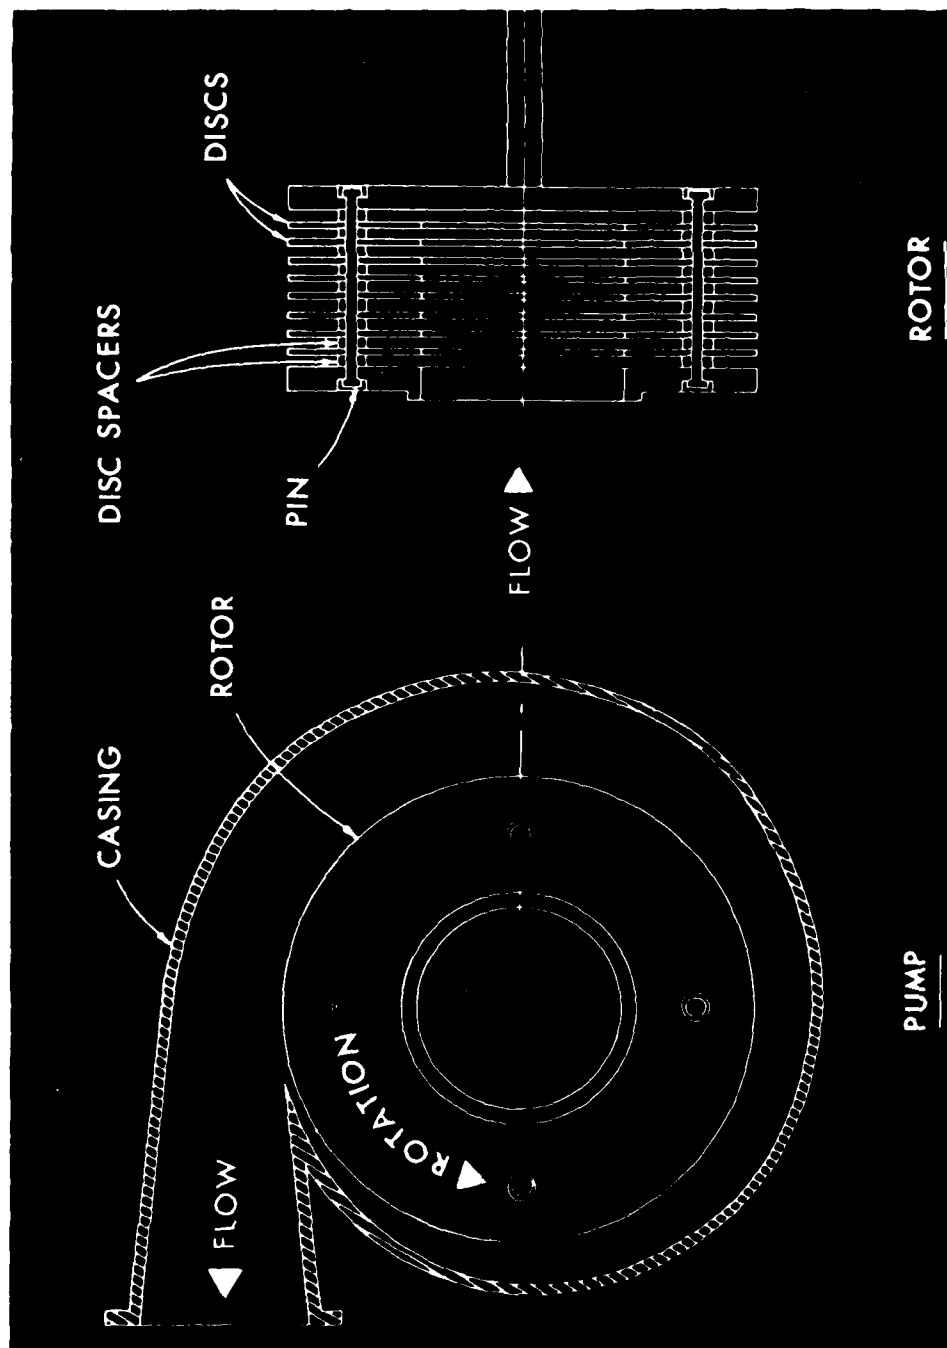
Sectional View of Disk Pump and Rotor Assembly with Volute Casing
